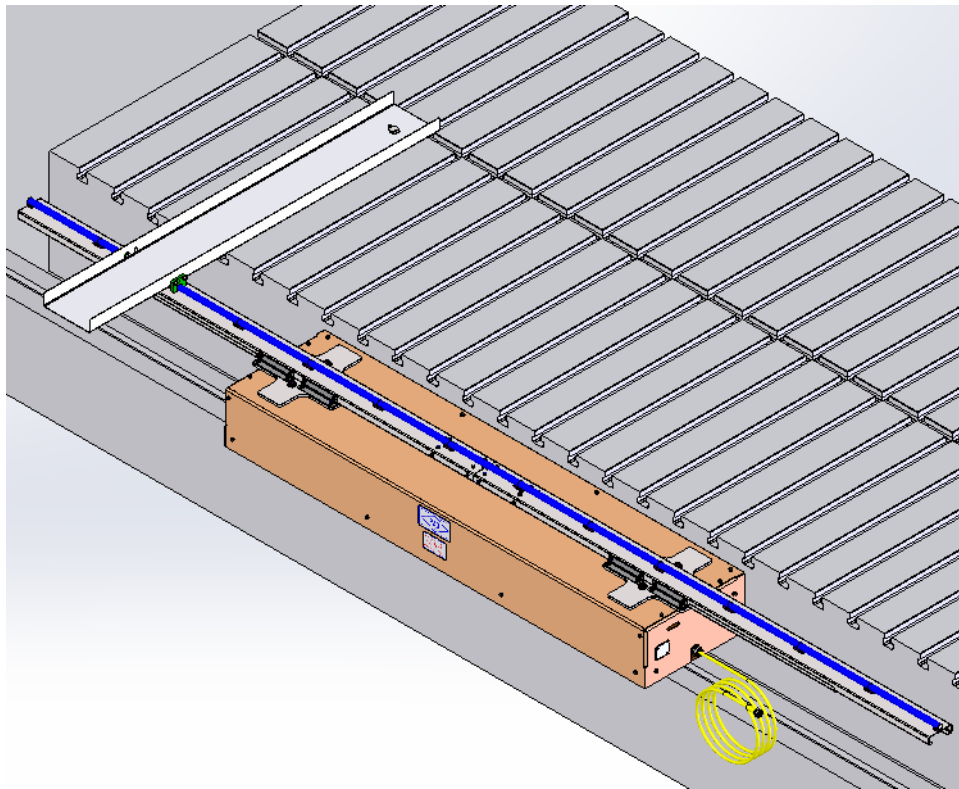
EGD-250-72 MOUNTED TO BOLSTER
